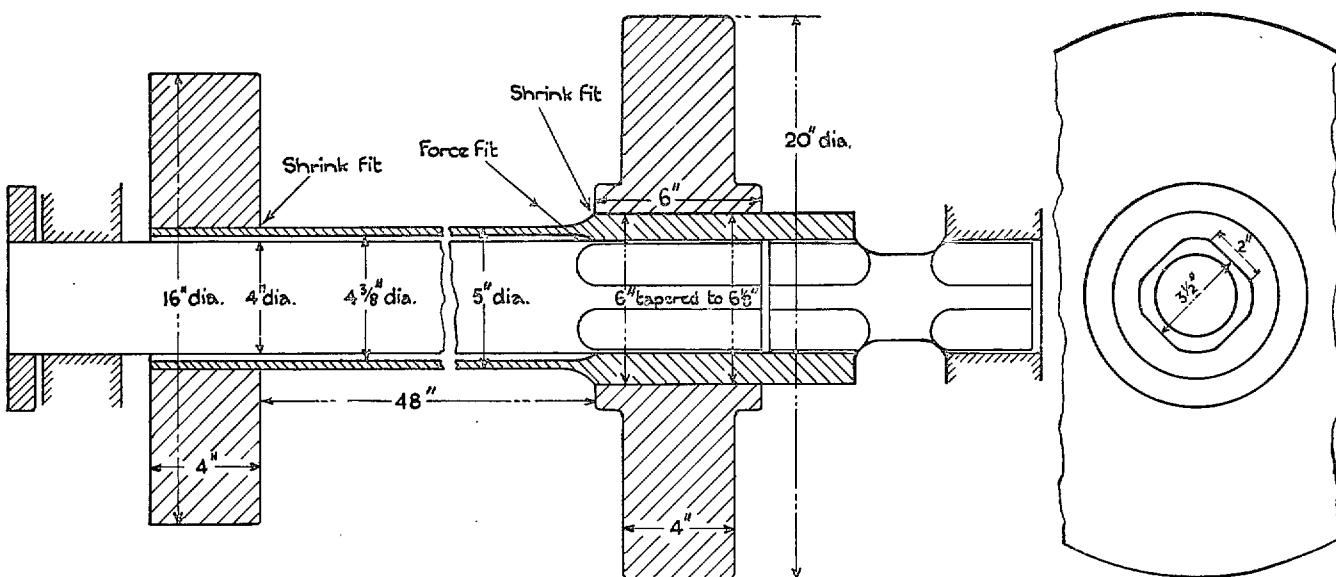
Schematic design of torsion fatigue-testing machine for 3-in. diameter specimens.
